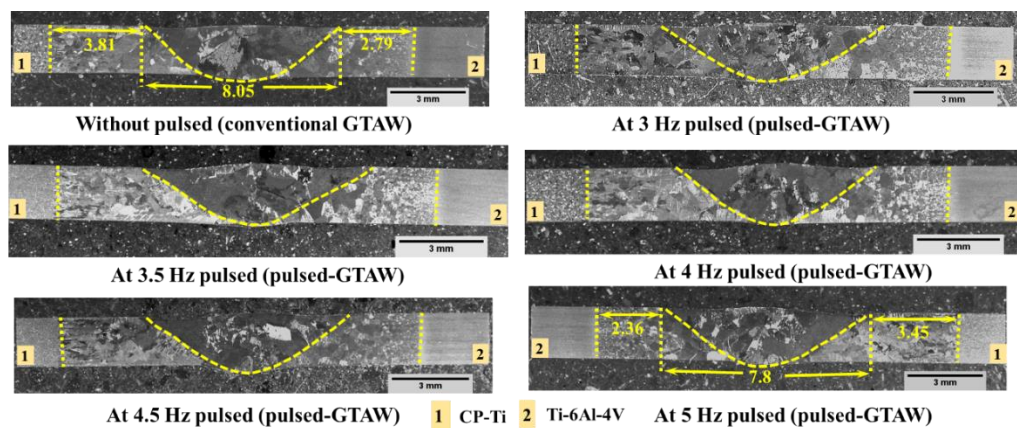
Dissimilar welded titanium alloy weld bead profiles using conventional and pulsed-GTAW at different frequencies
